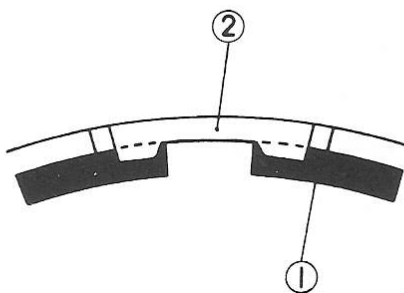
A.16 On YT 125/175 models, make sure the ends of the large circlip are located under one of the clutch housing tabs when reassembling the clutch (Sec 12)
